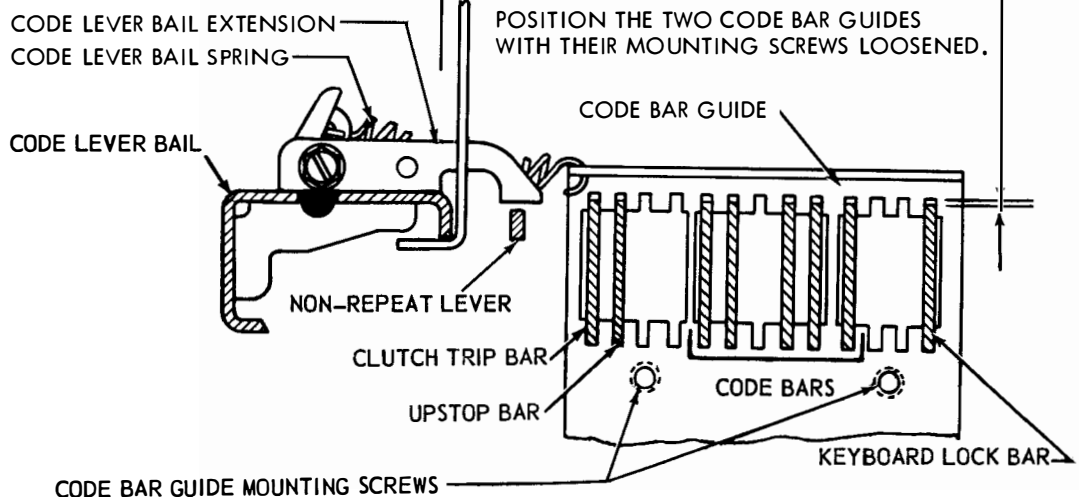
Keyboard, Code Bar Mechanism, Left Side View
